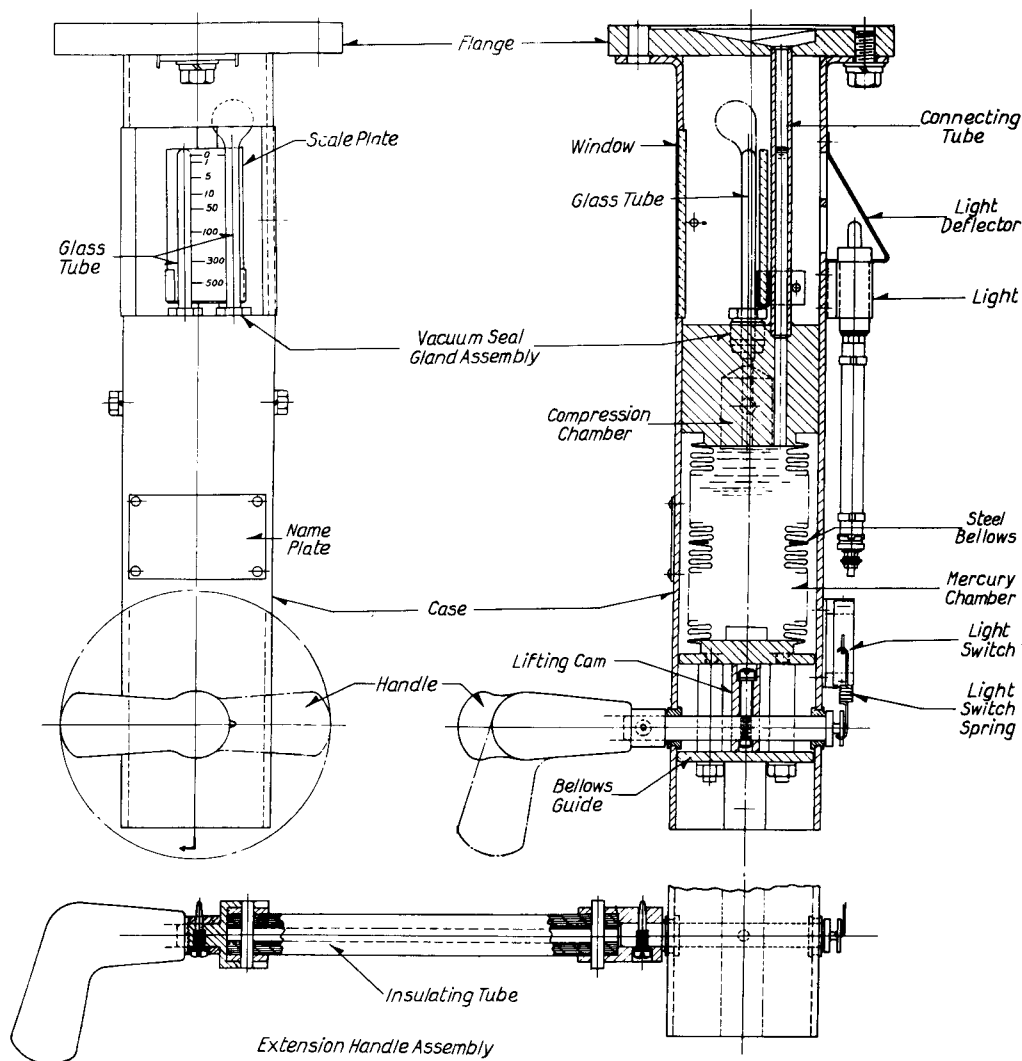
McLEOD VACUUM GAUGE (BELLOWS TYPE)
